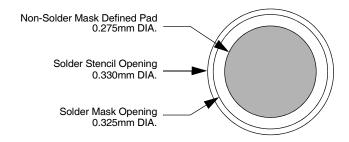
Recommended Non-Solder Mask Defined Pad Illustration
